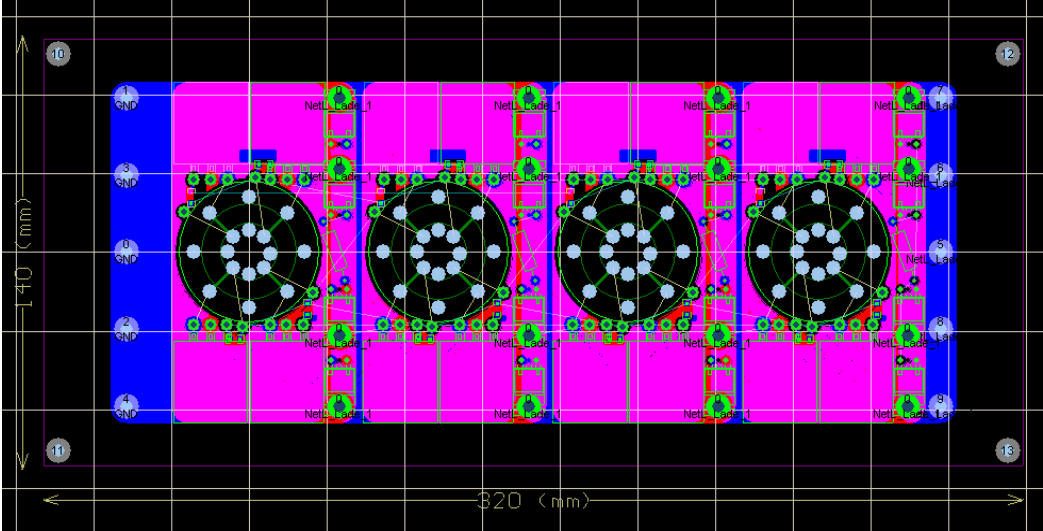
PCB board with four switching cells (red top layer); blue Bottom Layer
